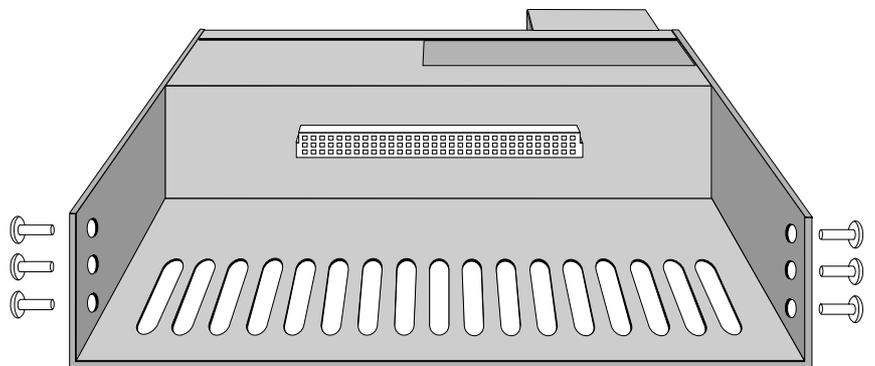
Bracket 11280 with power pack for mounting in 19"/1U rack mount kits
